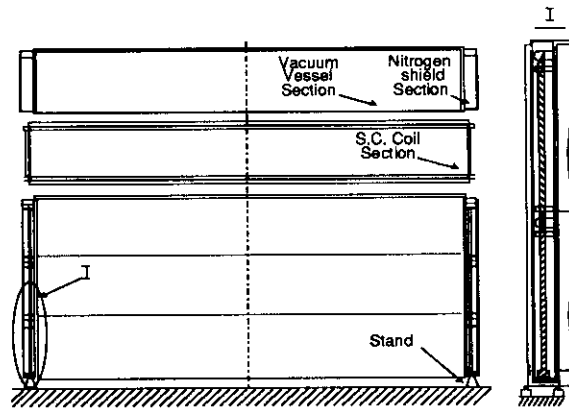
Assembly sequence of the 2 T magnet. On the righthand side a blowup of two coil sections is shown.
